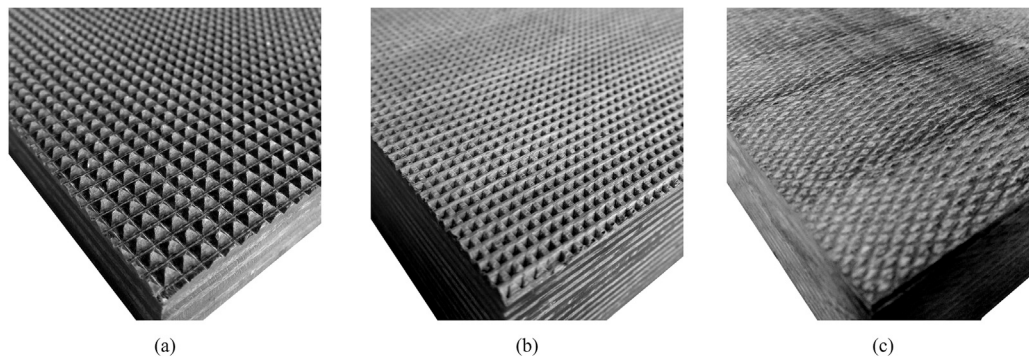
Different modified surfaces: (a) milled pyramid pattern with milling depth of 1.5 mm. (b) embossed surface with imprint of pyramid pattern (penetration depth of embossing punch of approx. 1 mm). (c) milled circular pattern (depth of grooves approx. 0.5 mm)
